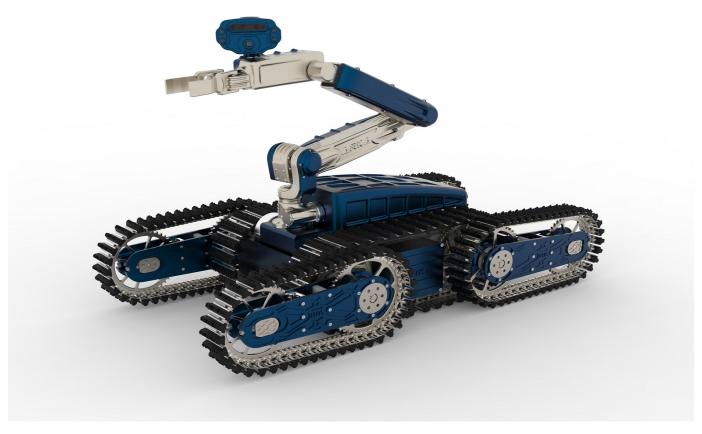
CAD drawing of ARKA and the 6-DOF manipulator
